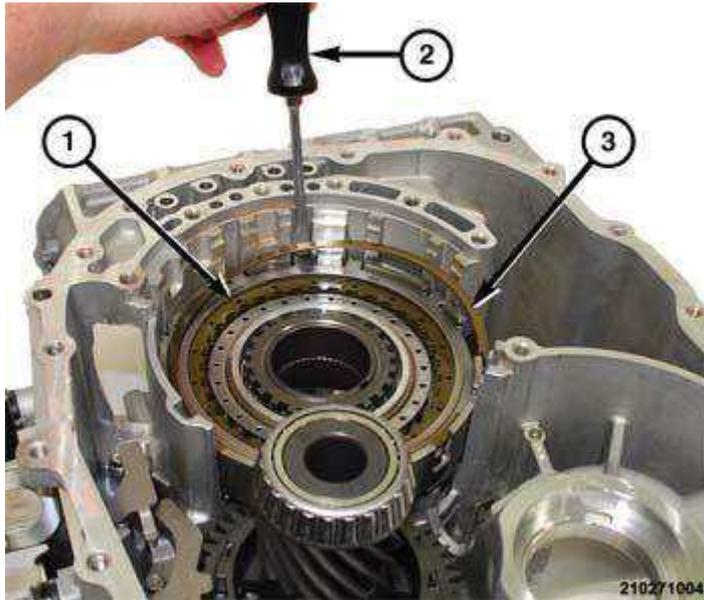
Underdrive Brake, Underdrive Brake Drum, & Large Snap Ring
